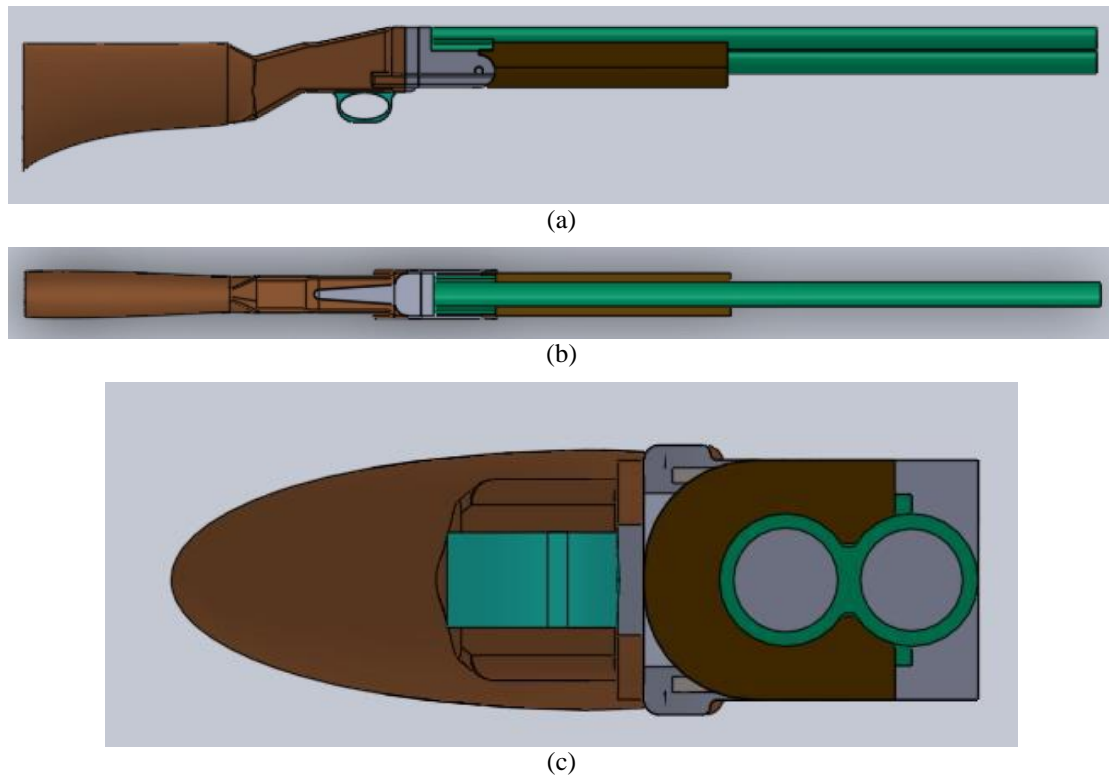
External view of the modified gun. (a) Side view, (b) top view, (c) frontal view.
